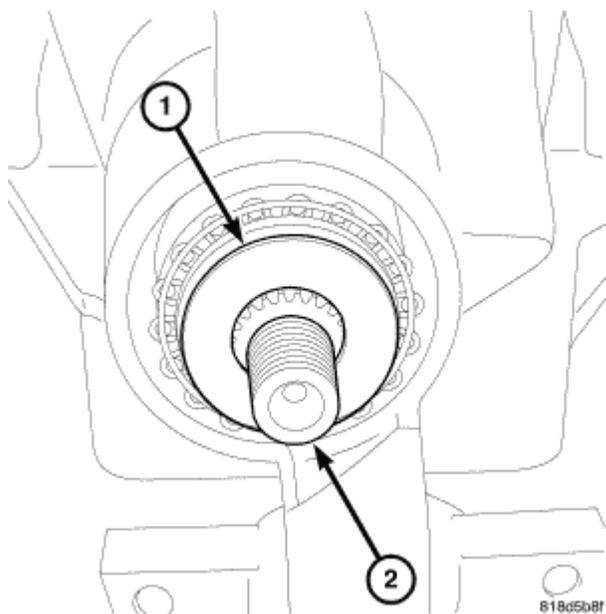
Installing Front Pinion Bearing Oil Slinger On Pinion Shaft
